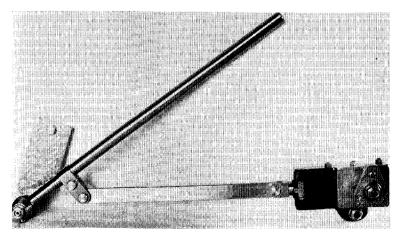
Shaping equipment fitted to a Winfield Lathe
